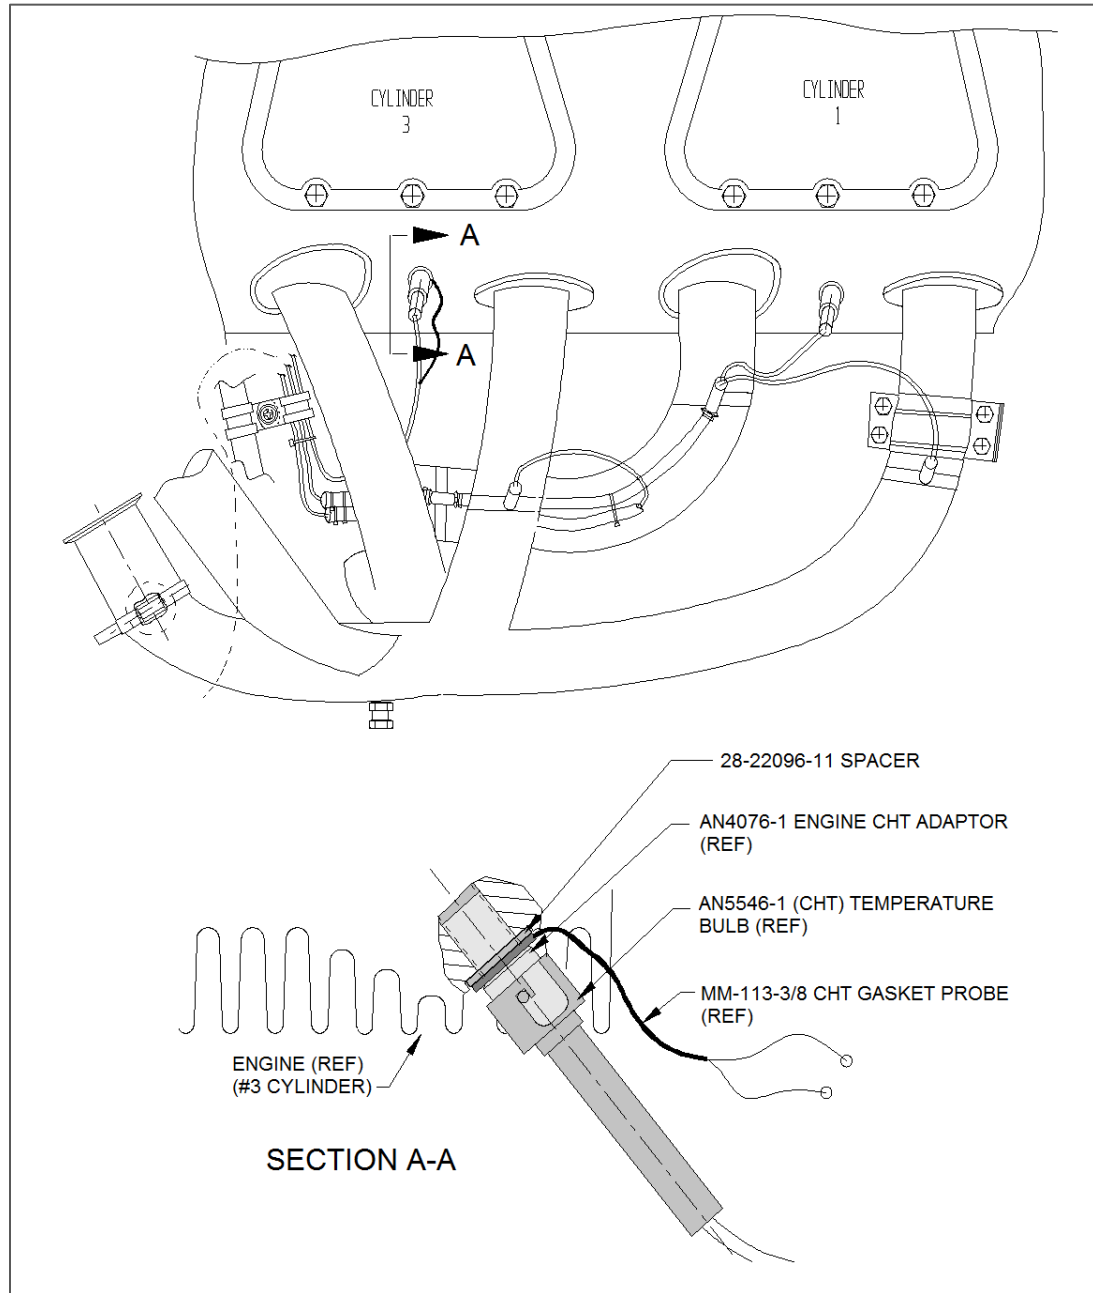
Cylinder #3 EDM-700 CHT Probe Installation
